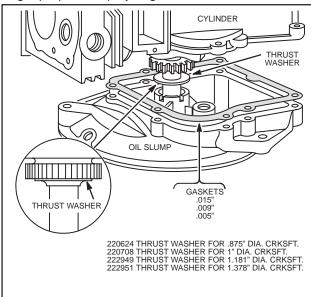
ADJUSTING CRANKSHAFT END PLAY
